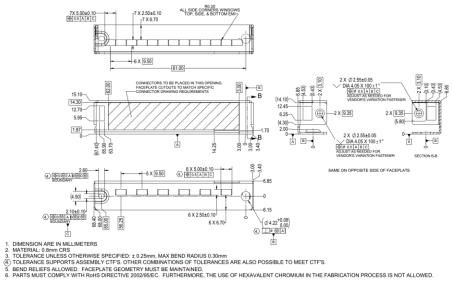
shows the standard SFF I/O bracket with a thumbscrew and <u>pull-tab</u> assembly.
